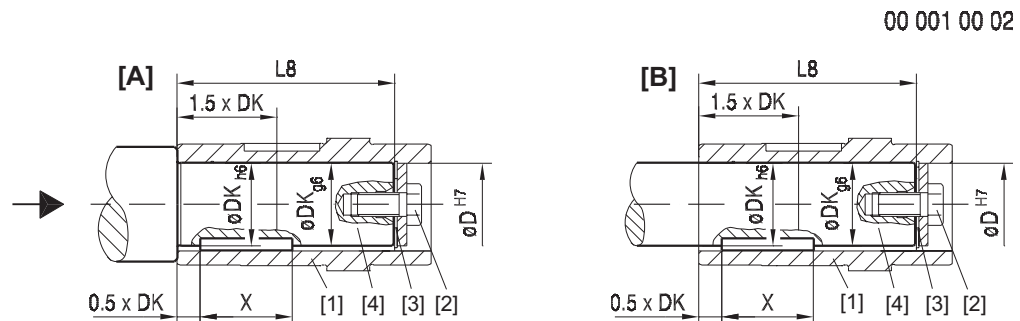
Customer shaft with contact shoulder [A] and without contact shoulder [B]
